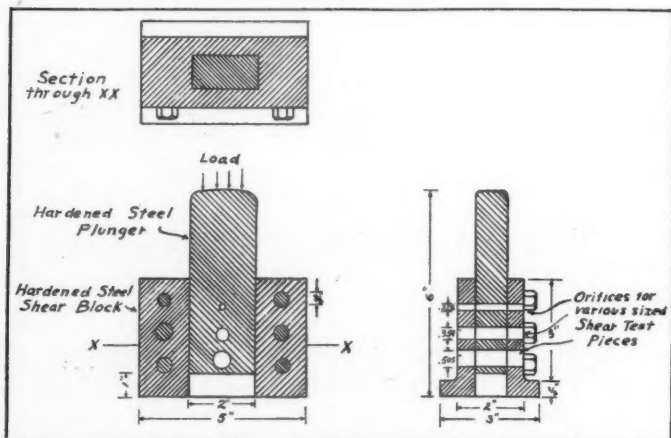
DEVICE FOR MAKING SHEAR TESTS—THIS DEVICE MAY BE USED ON ANY UNIVERSAL TESTING MACHINE
